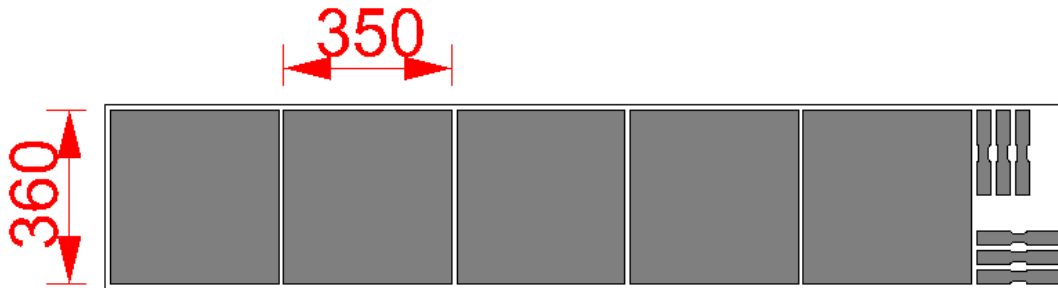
Cutting scheme of the molybdenum sheet (dimensions in millimetres)
